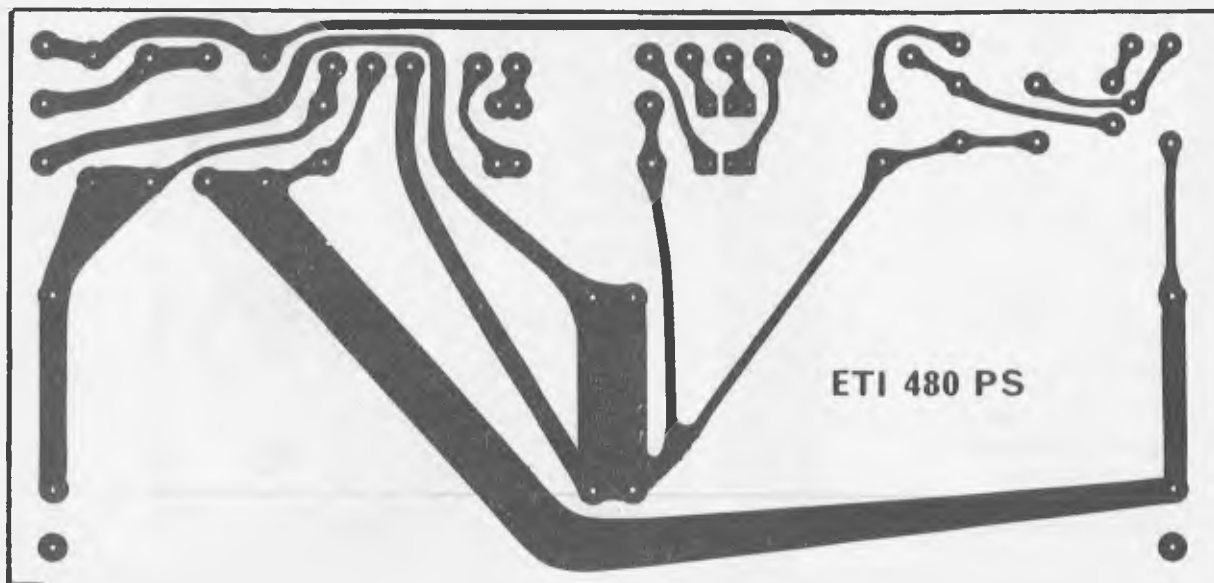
Printed circuit layout of the power supply. Full size 160mm x 76mm.
